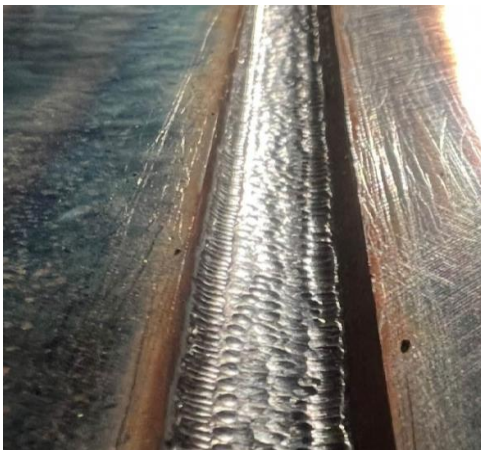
The weld after peening, a radius of a pin – 4mm
